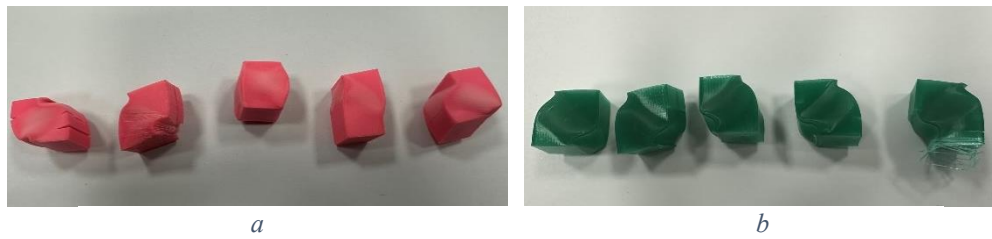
Deformation behaviour of FDM printed specimens after compression testing: (a) PLA specimens showing brittle failure and cracking, (b) PETG specimens showing ductile deformation and bulging.
